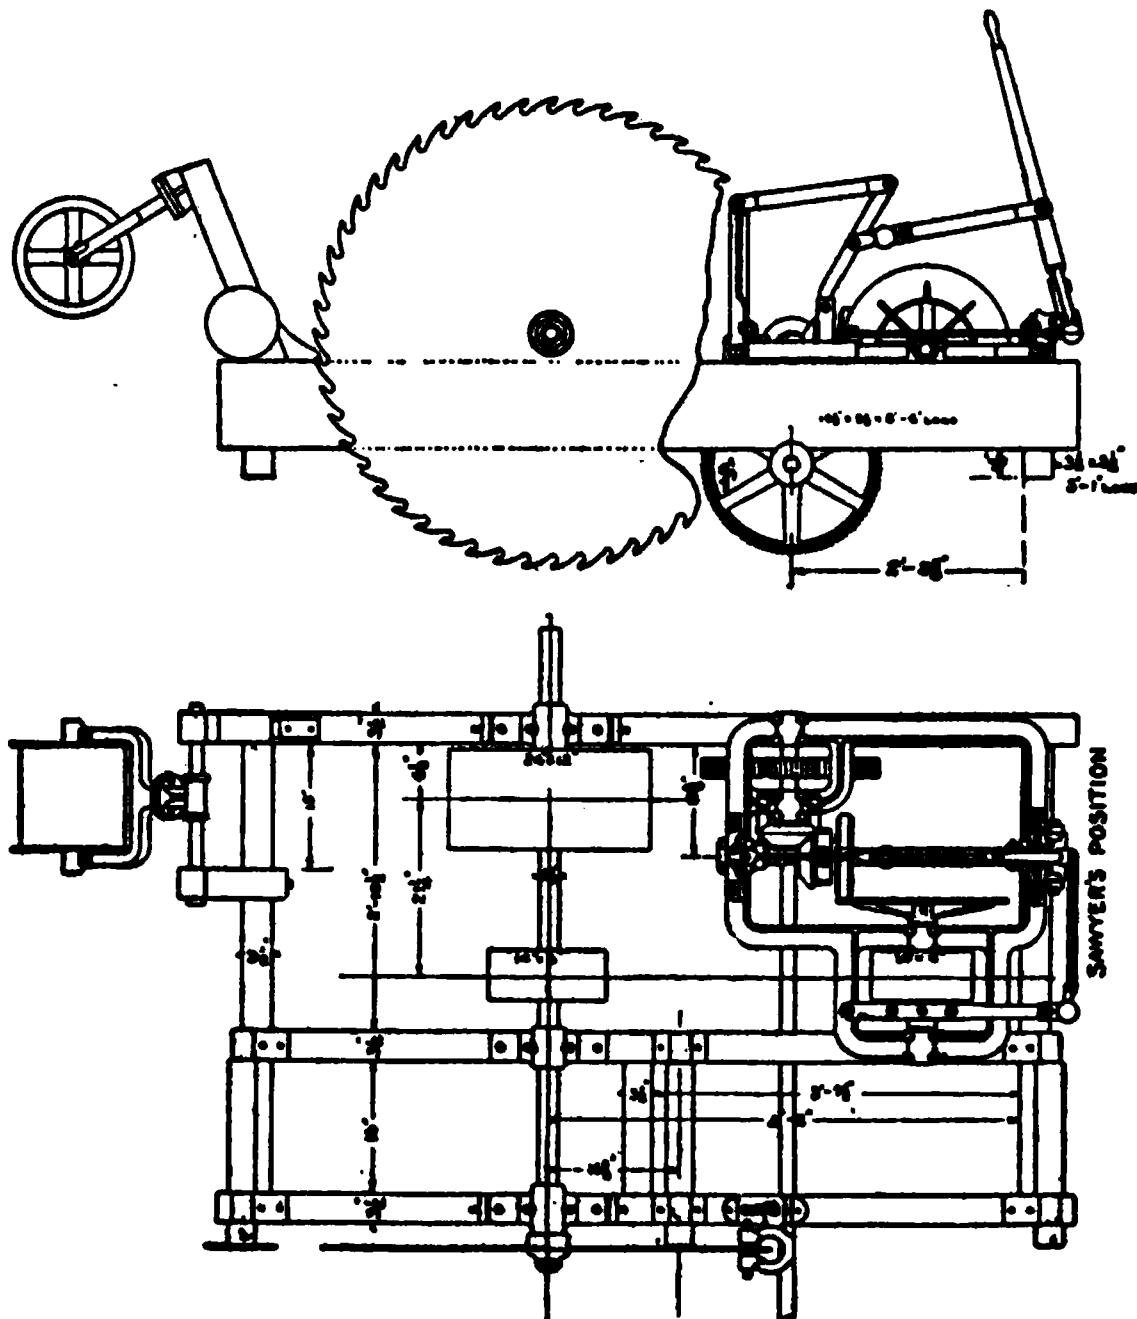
,411.—Semi-portable undermounted engine and boiler with saw mill, edging saw, slab saw, lumber hack, arbor extension and cable feed.
